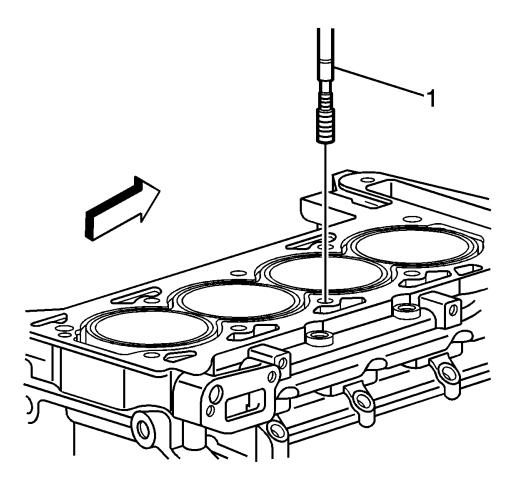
Installing Insert And Driver Into Hole Courtesy of GENERAL MOTORS COMPANY
